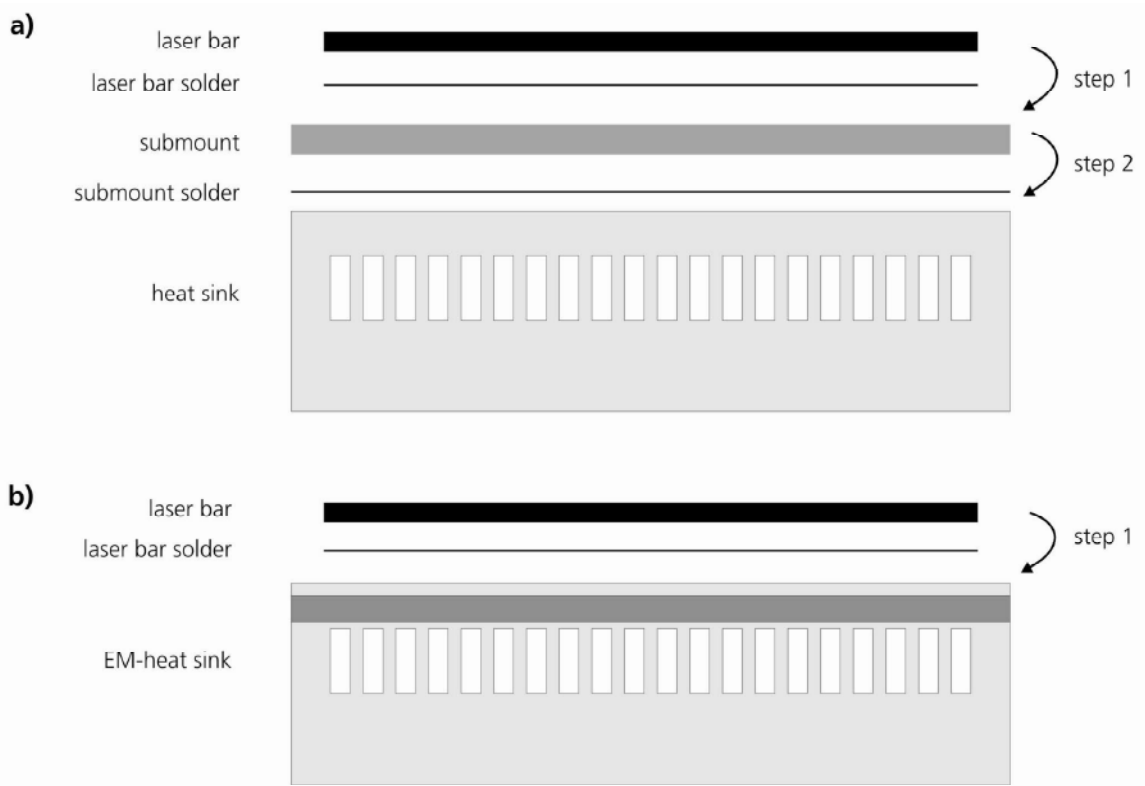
Schematic view (cross section) of heat sink assembly a) with submount and b) on expansion matched heat sink
